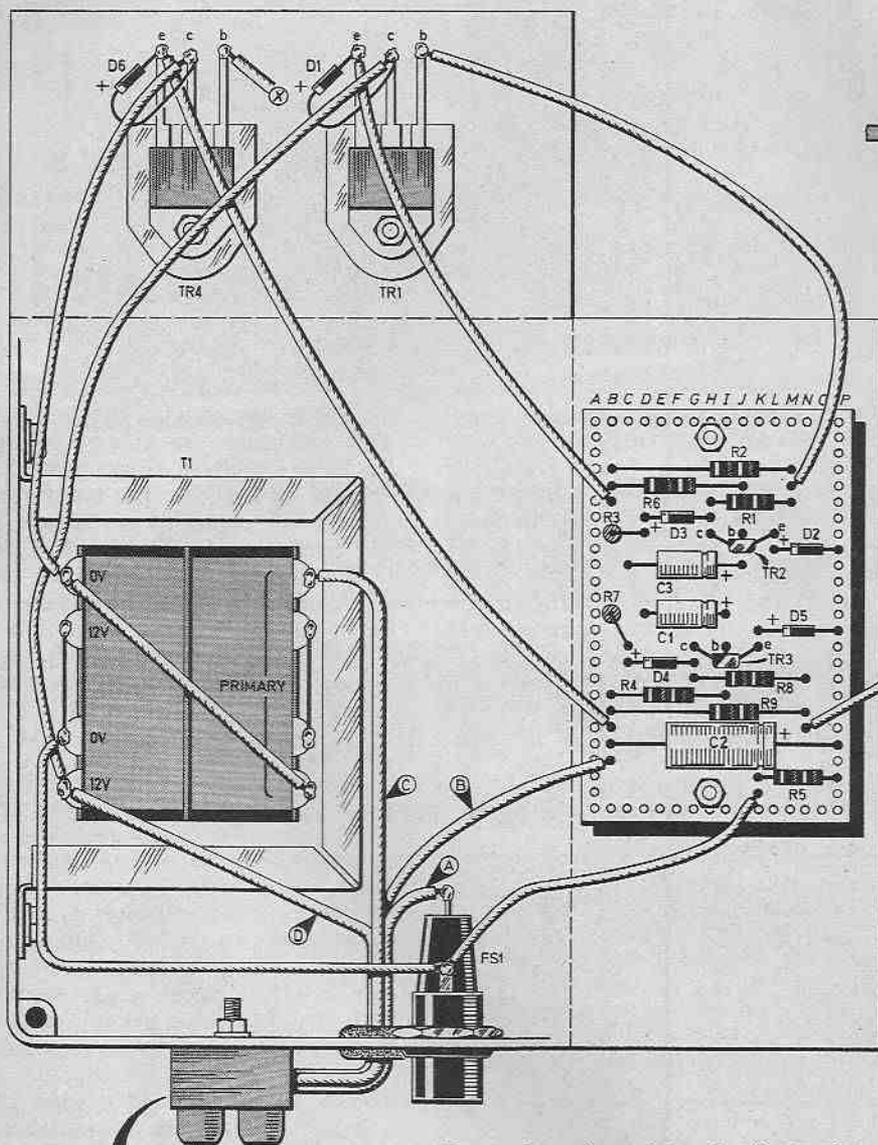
Complete wiring details for the Shaver Inverter. Also shown is the stripboard layout. The only breaks to be made are those which isolate the mounting screws. Be very careful when mounting the two power transistors to ensure that they do not short to each other or to the side of the case. It would be advisable to place sleeving over the leads also to prevent short circuits. Ensure also that the tags of the transformer are bent down as far as possible otherwise they may touch the lid when this is in place.
